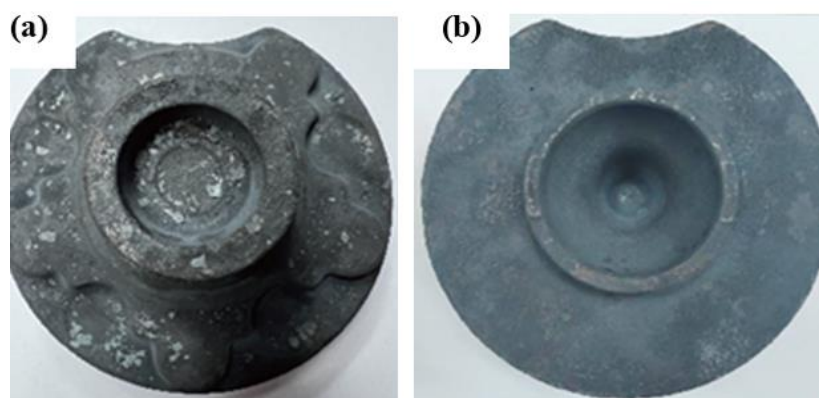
Wheel-hub-bearing inner-ring forgings produced under the optimized process conditions
